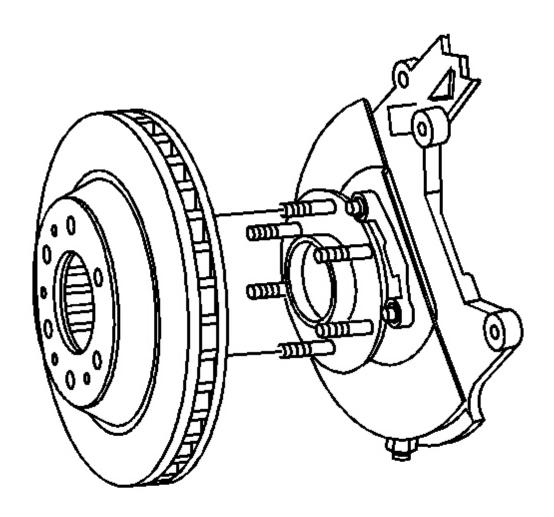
Brake Rotor Removed From Hub Courtesy of GENERAL MOTORS CORP.
